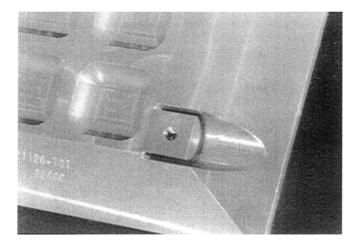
Closeup view of a mounting ear (flexure) machined into a metal mirror. (From Zimmerman.¹⁹)
